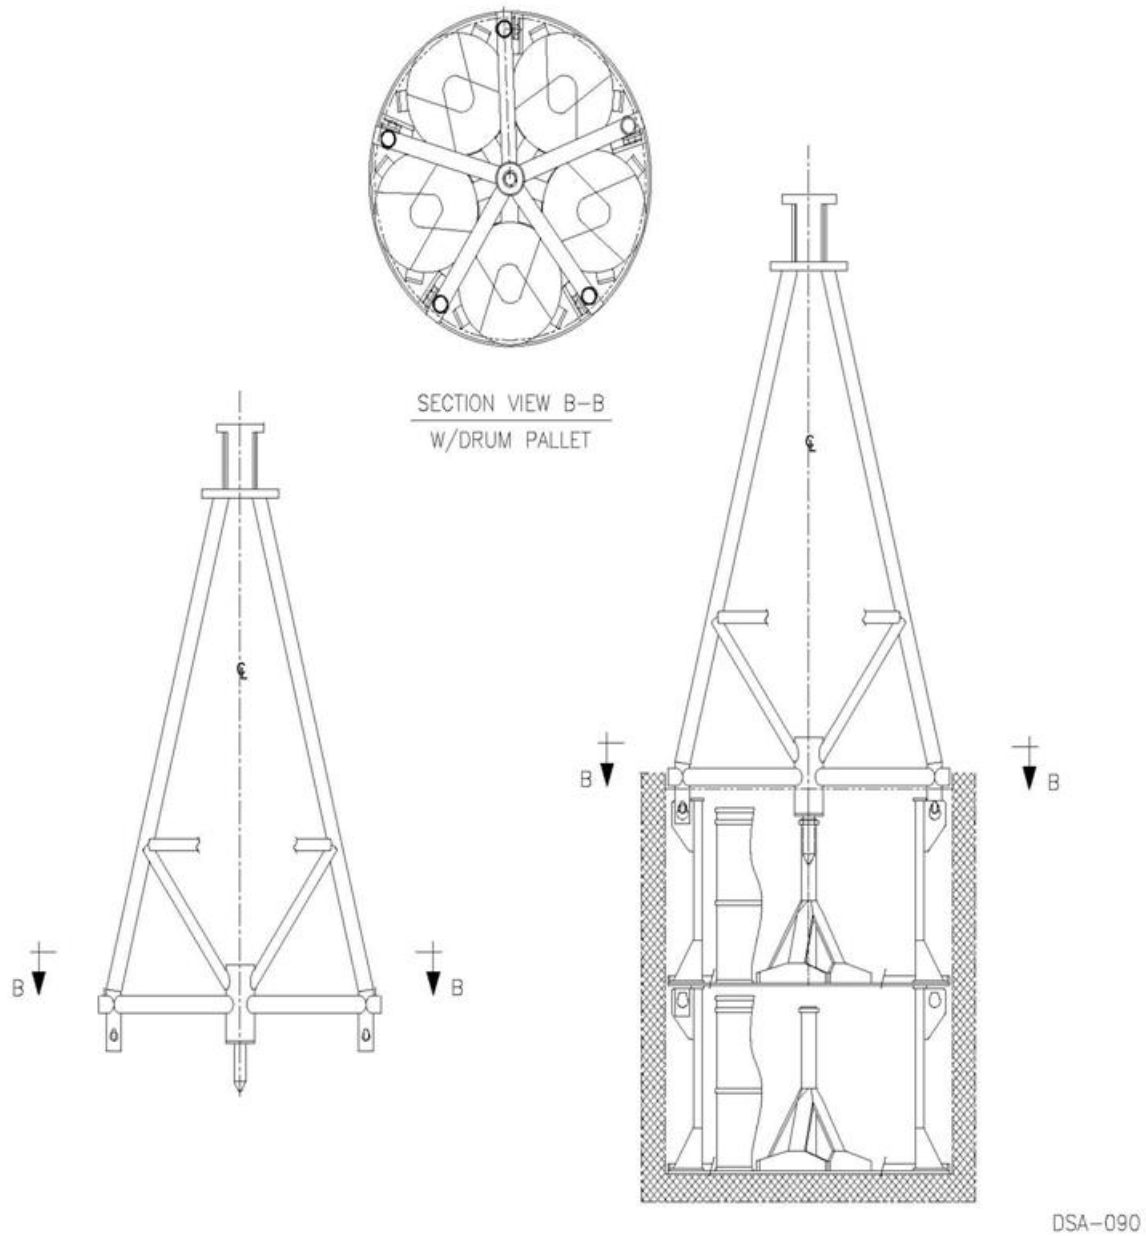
10-160B Drum Carriage Lifting Fixture
